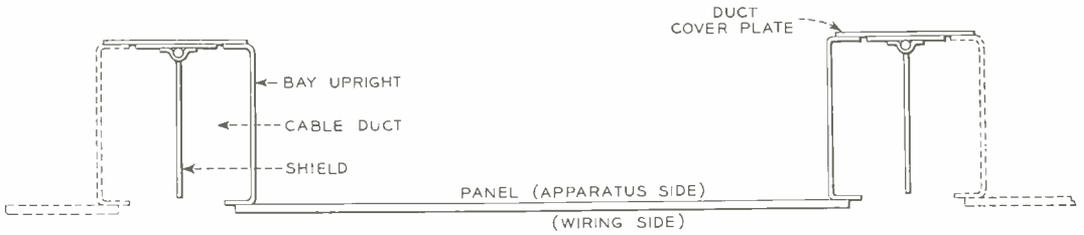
Cross section of the new duct type bay arranged for single-sided mounting.
